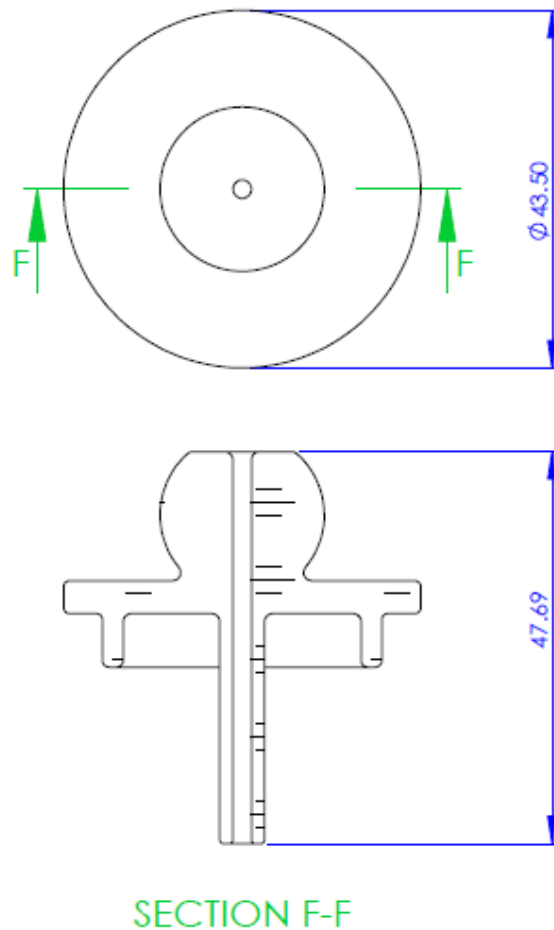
Diagram and dimensions of the SWITCH - Marble Carb Cap. All dimensions are in mm.
